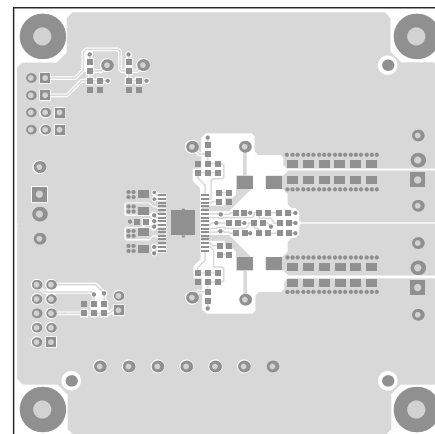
TPS563900EVM-574 Top-Side Layout
